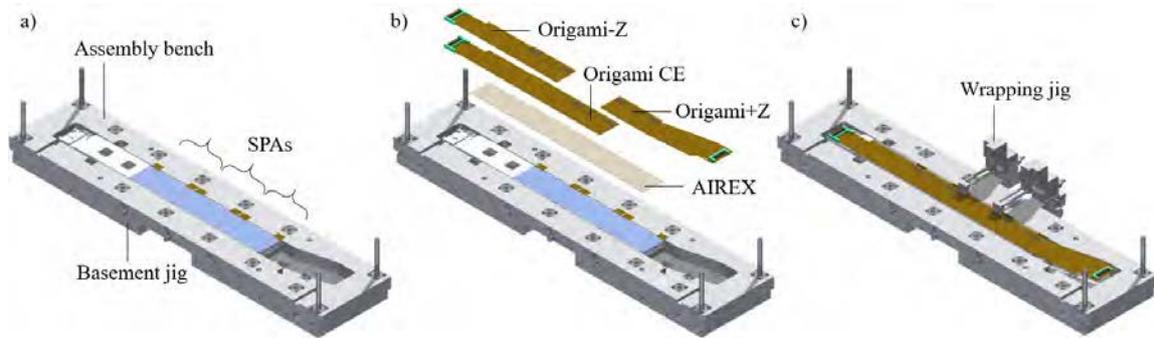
a) The assembly bench positioned on the basement jig. b) Origami boards gluing. c) PA1/PA2 wrapping from DSSD P-side to the top of the origami boards.
